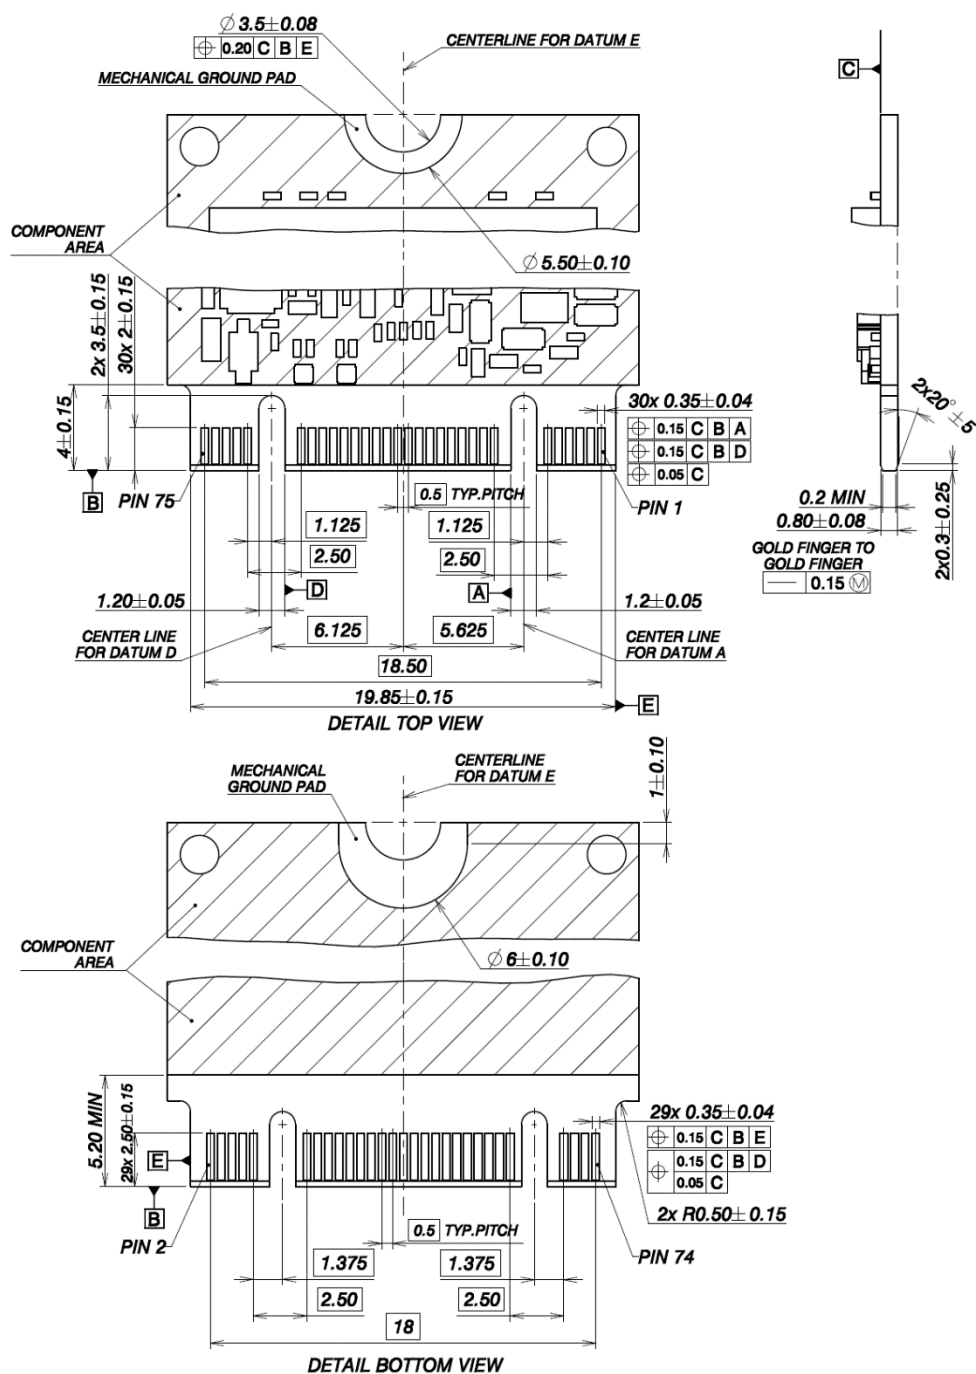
Interface Dimensions of KSG6xZMVxxxx (M.2 2280-S2 Module)
